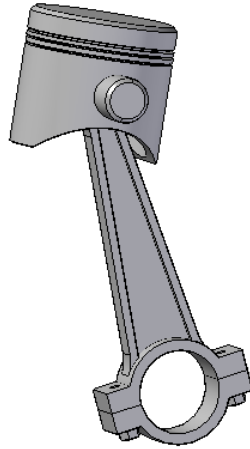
Assembly after modifying the diameter of the hole on the piston
